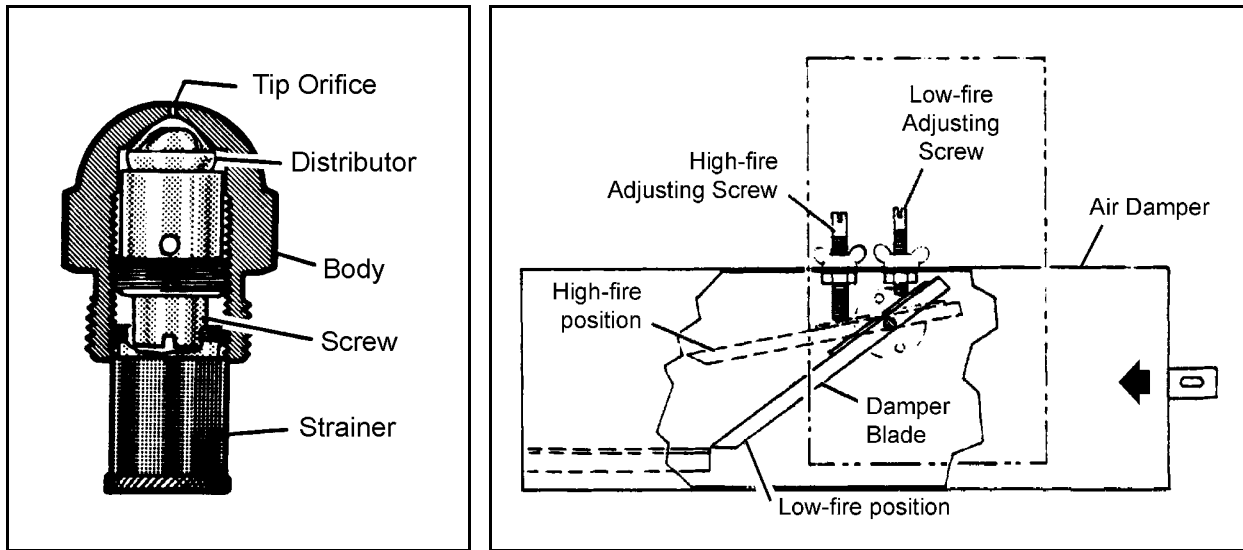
Oil Burner Nozzle, left; Air Damper, right
